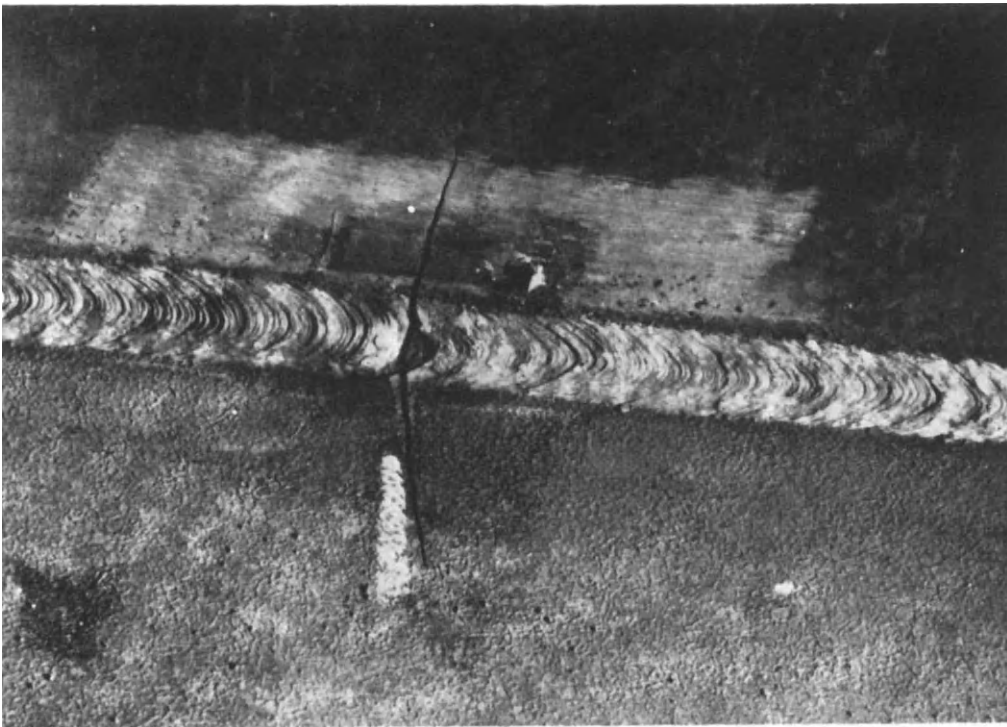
Fatigue crack initiated from pronounced surface ripple at start-stop position in manual web to flange fillet weld.⁽¹¹⁰¹⁾
